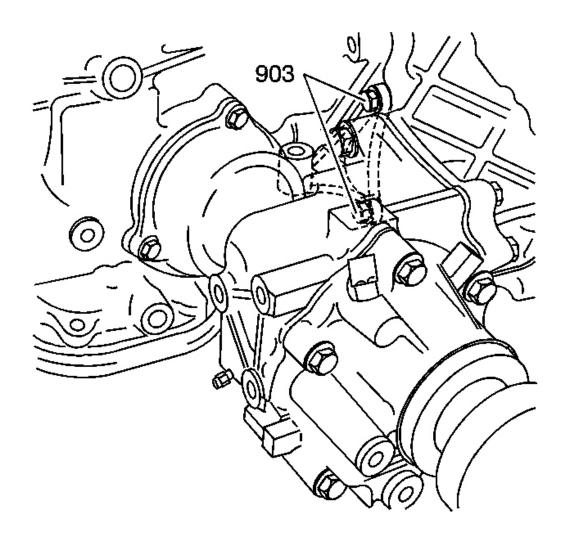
Locating Transfer Case Lower Brace To Transfer Case Bolts Courtesy of GENERAL MOTORS CORP.
